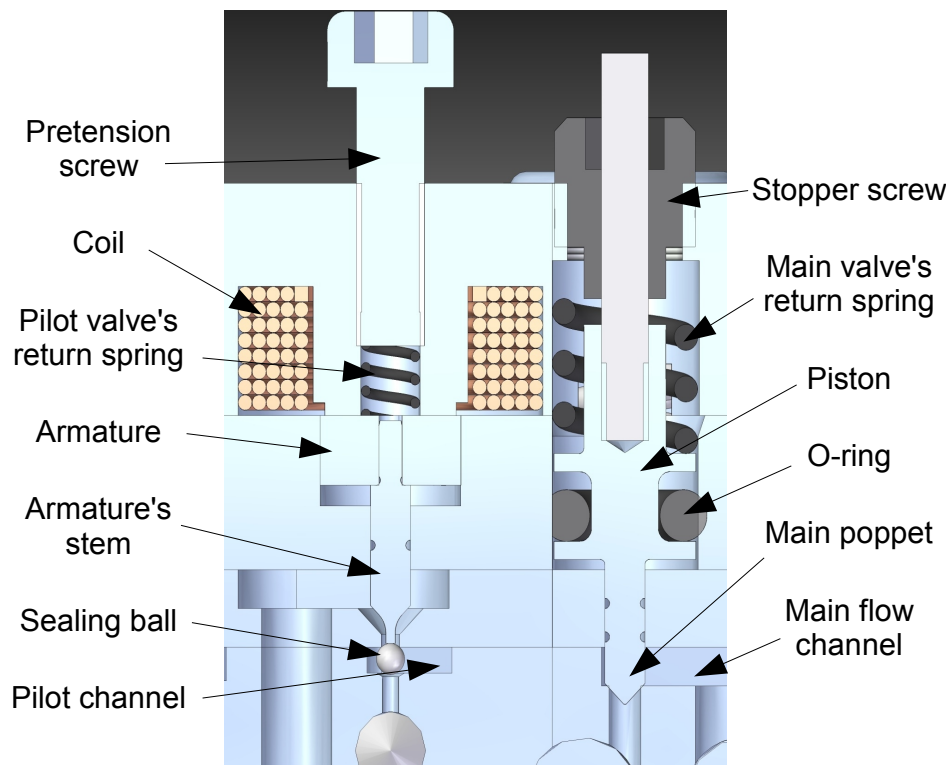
A cutout of the pilot valve and the piston of the main valve.
